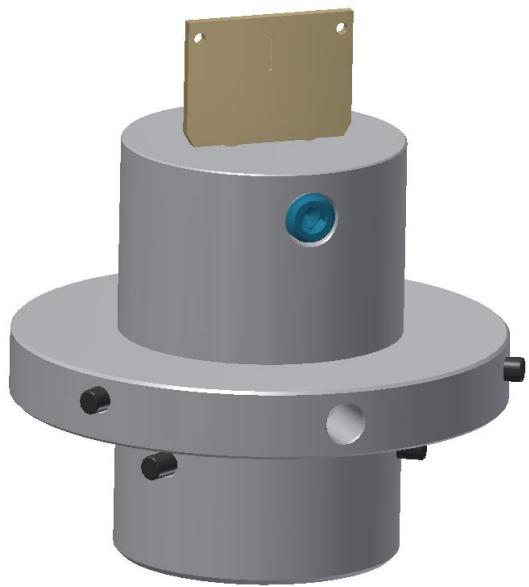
685.08530 Specimen Mount, Tall, Rotatable
